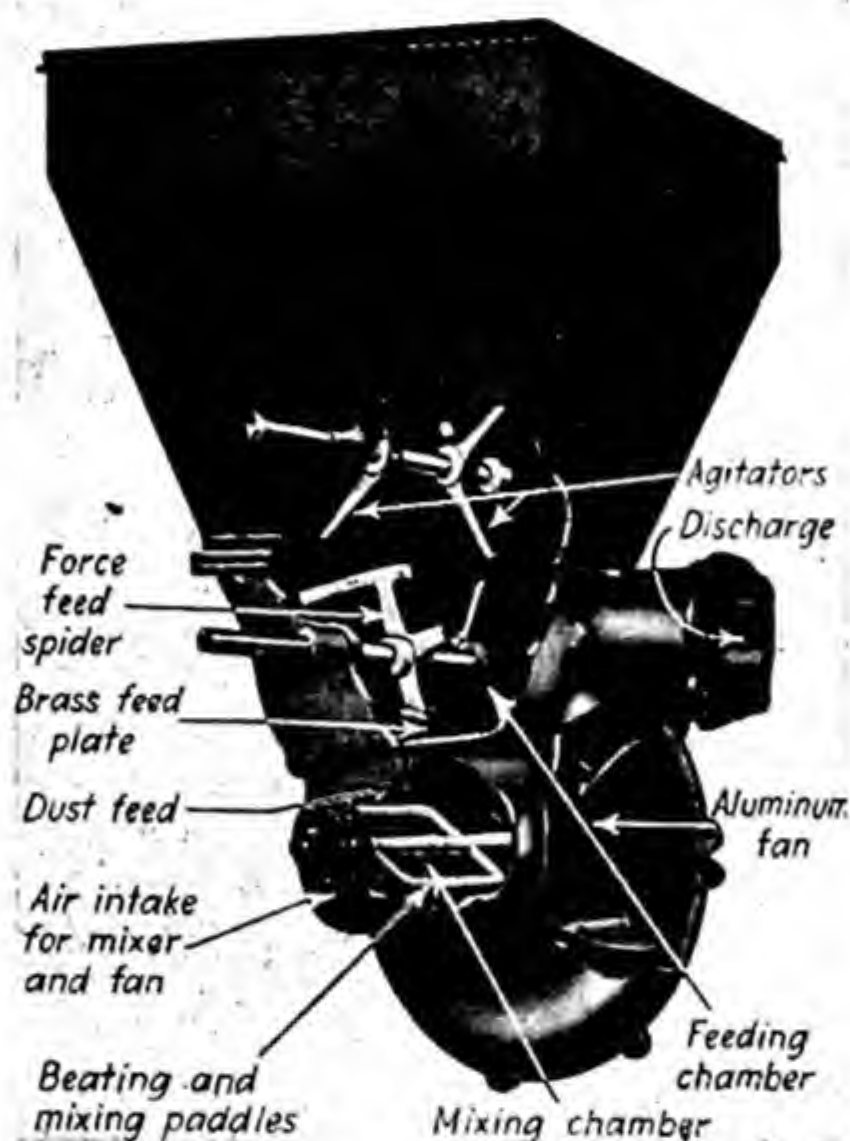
Sectional view of a duster showing hopper, agitators, feed, and fan.
